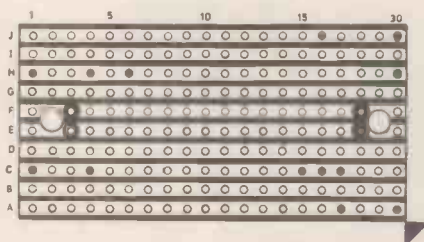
Mains power supply (p.s.u.) stripboard component layout, less transformer.
